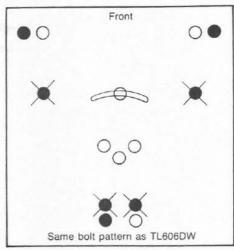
HMK-2 Board, Top View Horn extended from cabinet (for fixed horn position)
